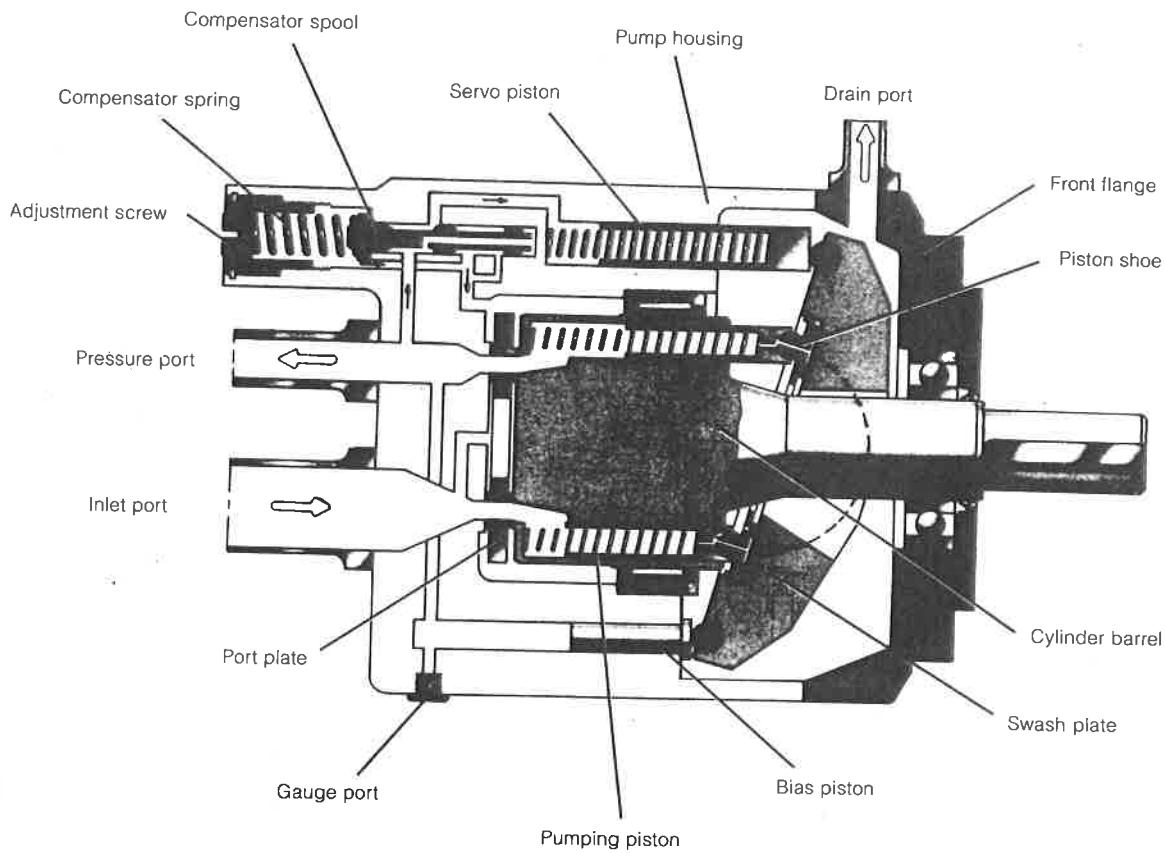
Cross-sectional drawing of an axial piston pump with compensation. The servo piston controls the angle of the swash plate. Source: Parker-Hannifin Corp., Cleveland, OH.
